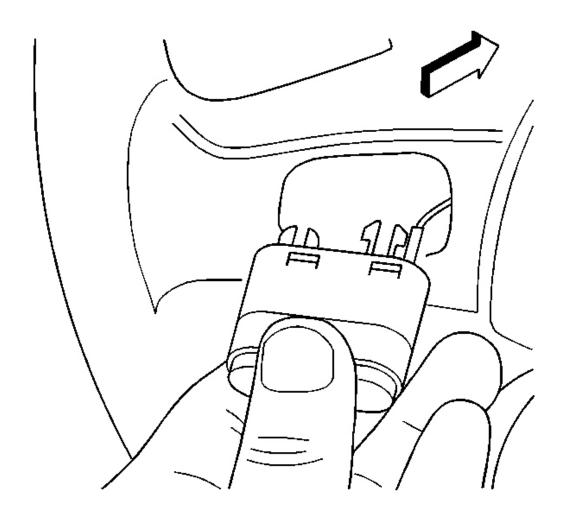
View Of Steering Wheel Control Switch Electrical Connector Courtesy of GENERAL MOTORS CORP.
